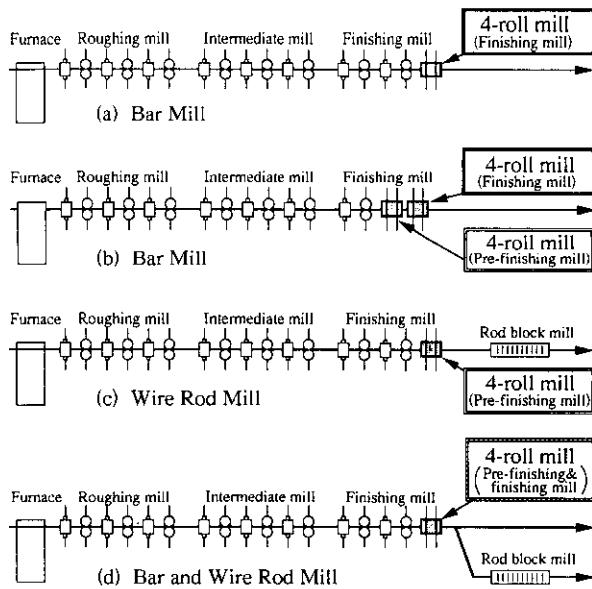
Application examples of 4-roll mill to Bar Mill and Wire Rod Mill
